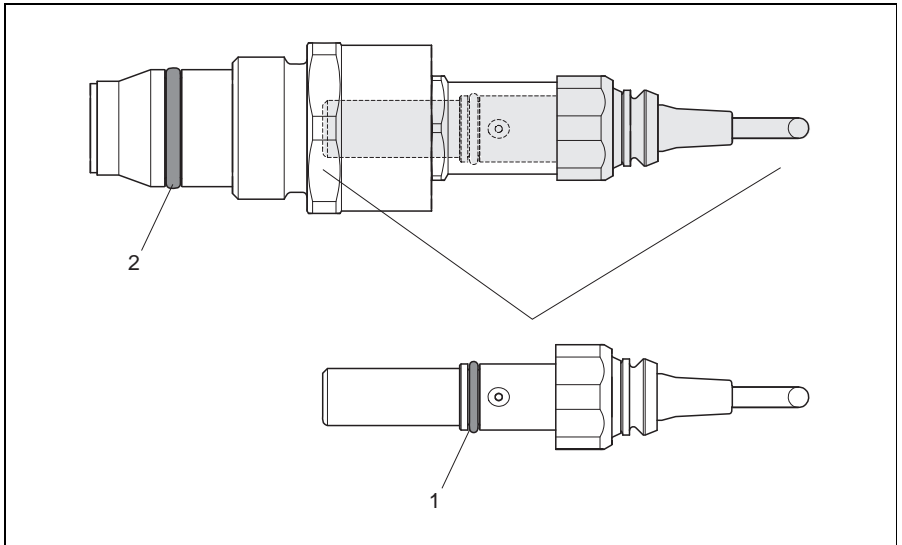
Mounting instructions for sensor connectors with IP 68 protection
